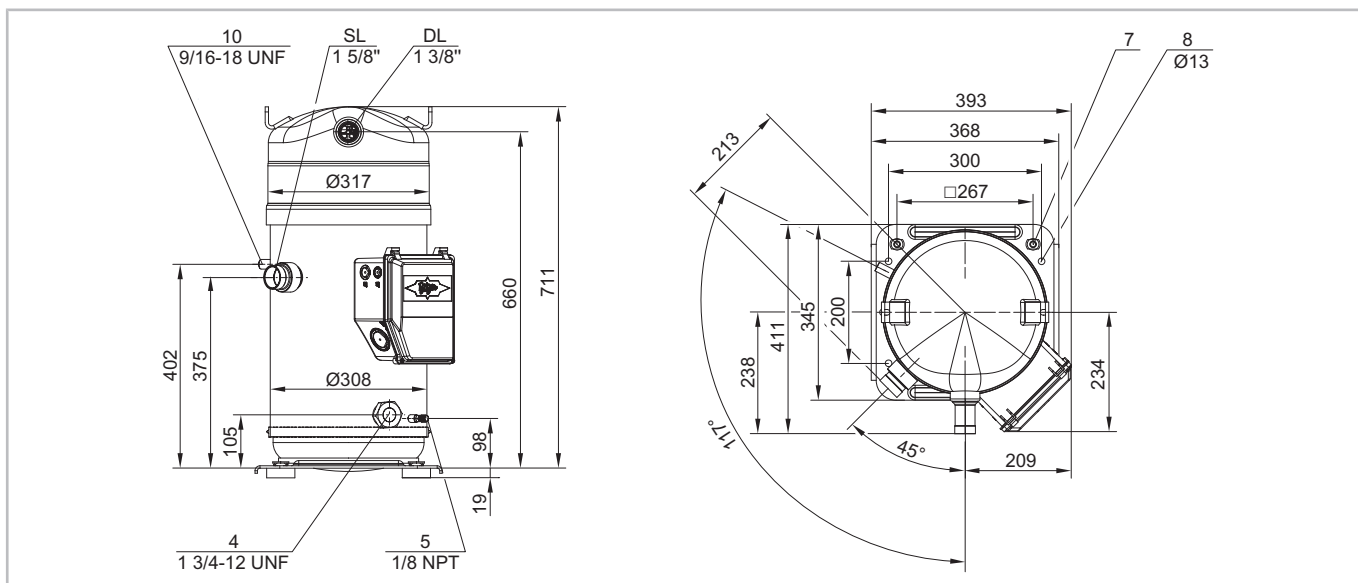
Dimensional drawing ORBIT FIT: GED80295 .. GED80485
